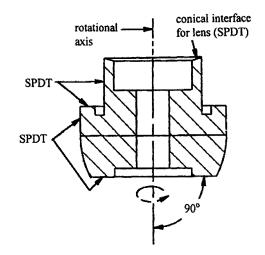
A centering chuck tool designed to interface a lens to the SPDT machine. Surfaces indicated by SPDT are machined in the same setup for maximum precision.
